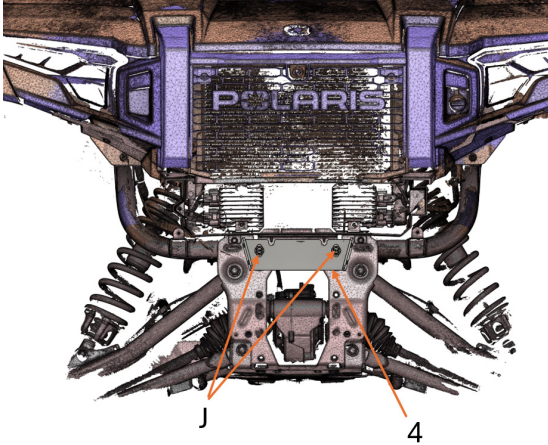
Loosley Mount the Middle Mount to the frame using a 15mm Socket
